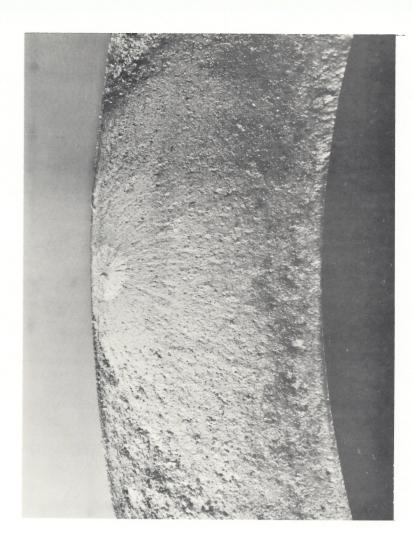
Fracture Surface of Special Shaft of AISI 4350 at Rockwell C-38. Outer Surface Cold Rolled in Final Processing.
